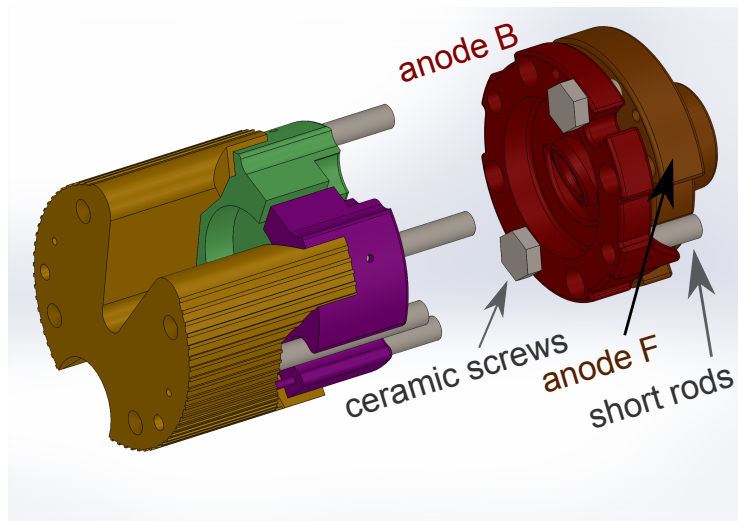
Second assembly step of the OAG. The copper anode is held together by ceramic screws.
